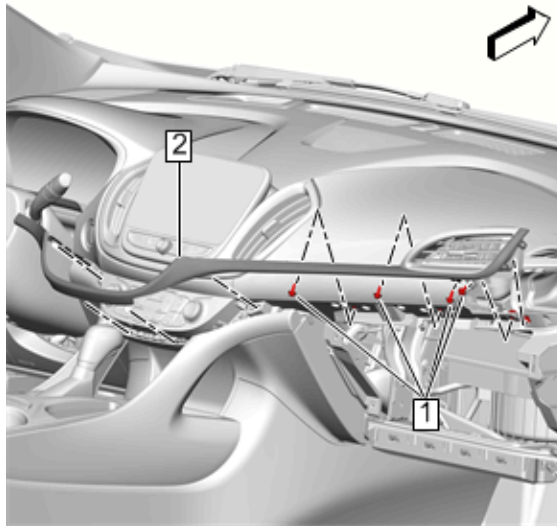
Instrument Panel Trim Plate Applique - Right Side And Bolts
